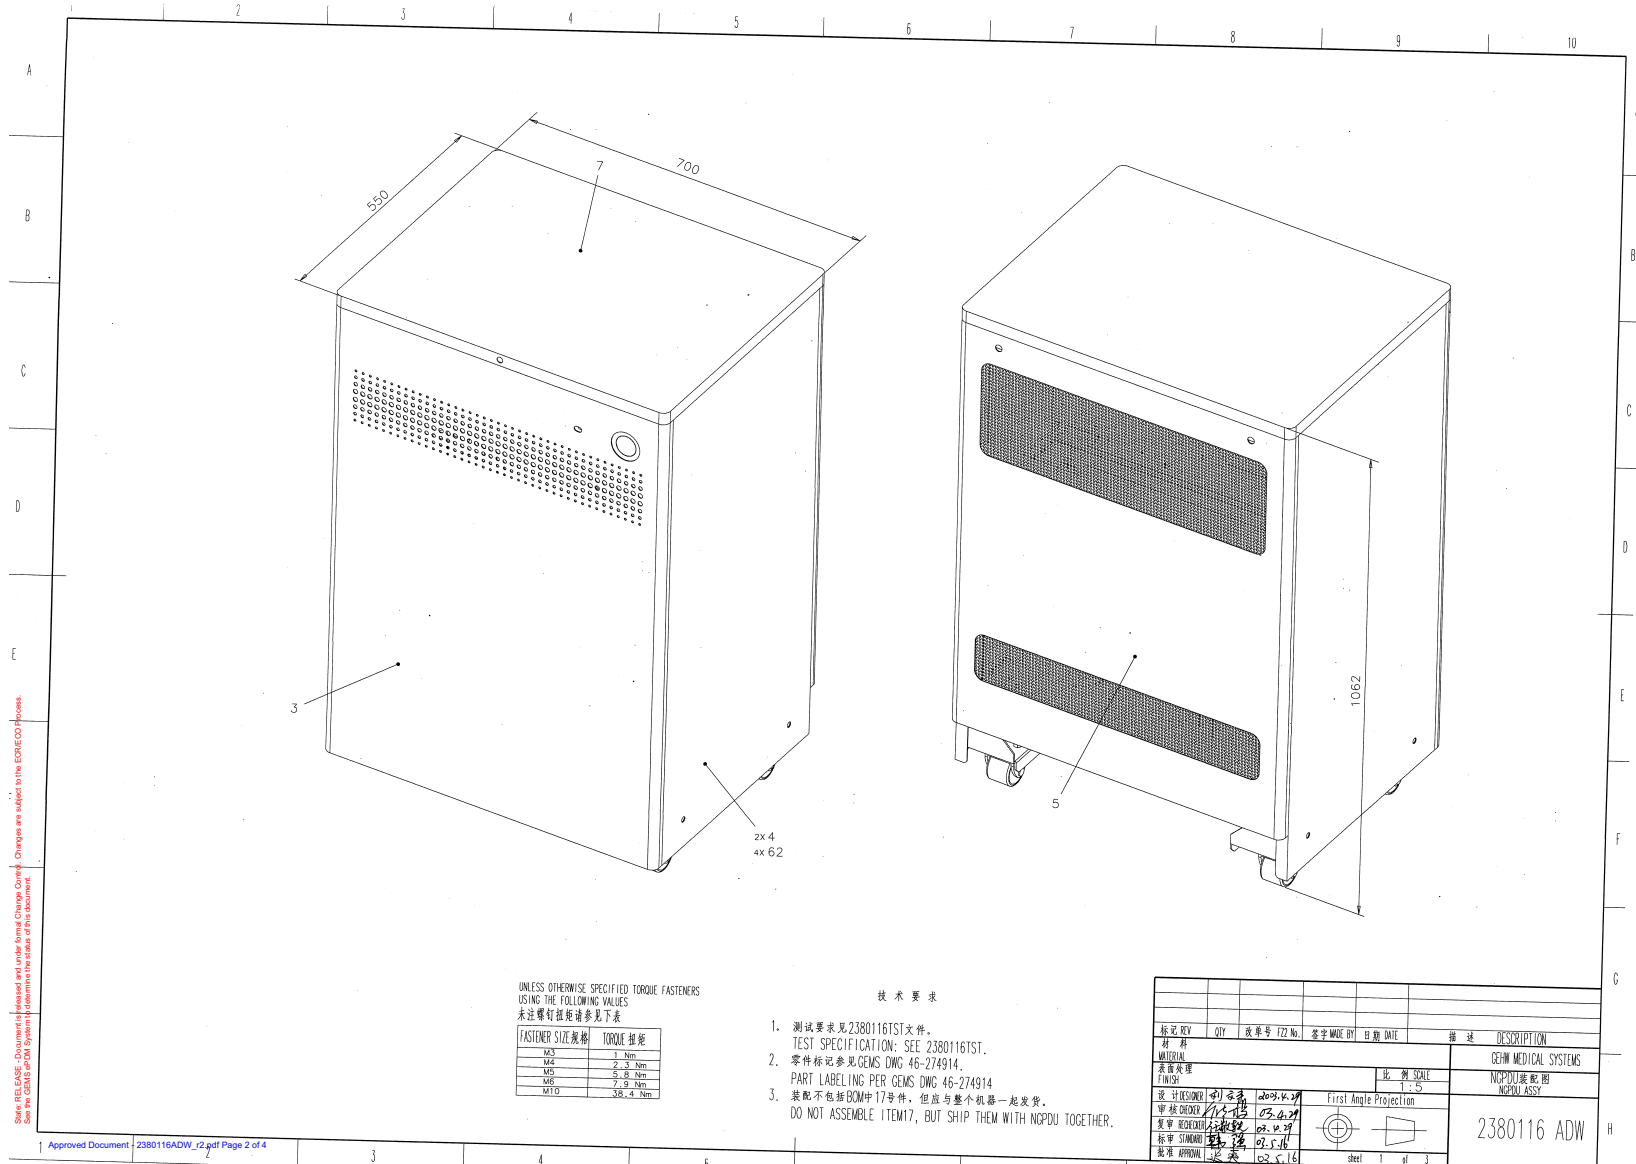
NGPDU ASSEMBLY3 (2380116ADW, sheet 1, rev 2)
